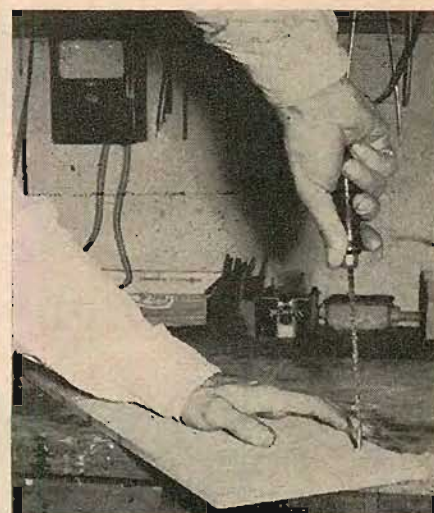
Demonstration of use of Stickleback saw to make starter hole for keyhole saw. This "saw" is capable of drilling its own hole—with it, a person could literally saw his way out of a box.
